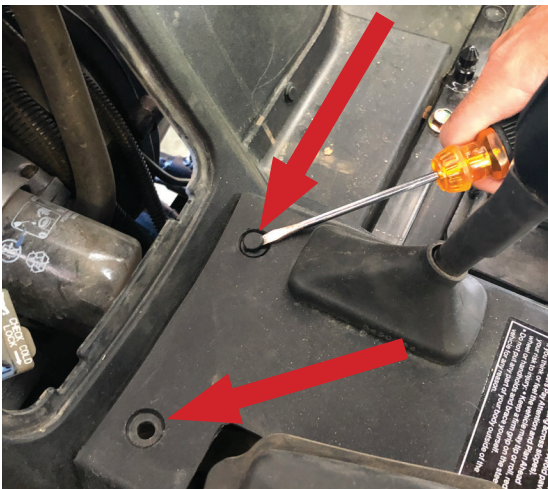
This image shows 2 screws on passenger side that need to be removed. There are also one on the driver side that need removed as well.
